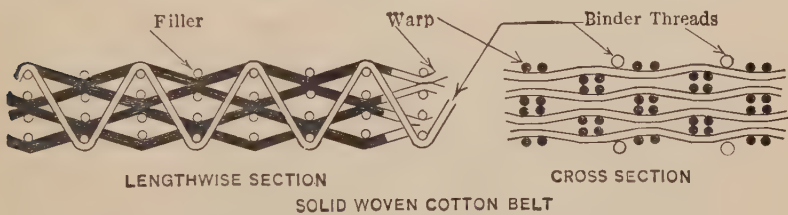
Diagram Showing Assembly of a Solid-woven Belt.
